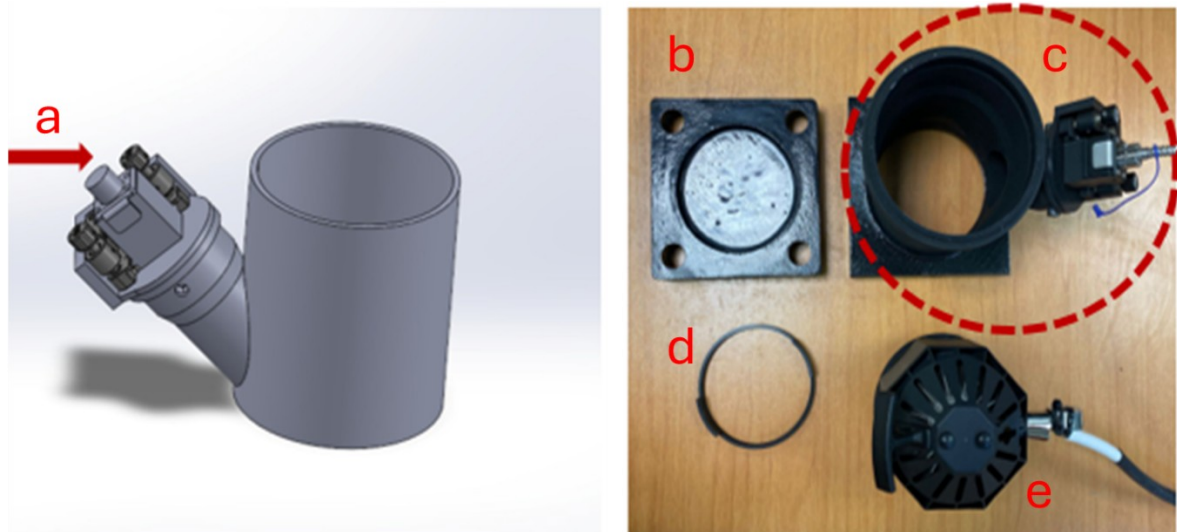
Components of the developed measurement chamber: (a) 3D CAD view of the assembled measurement chamber, (b) sample holder, (c) measurement chamber, (d) aluminium can sample adapter, and (e) tungsten–halogen lamp.
